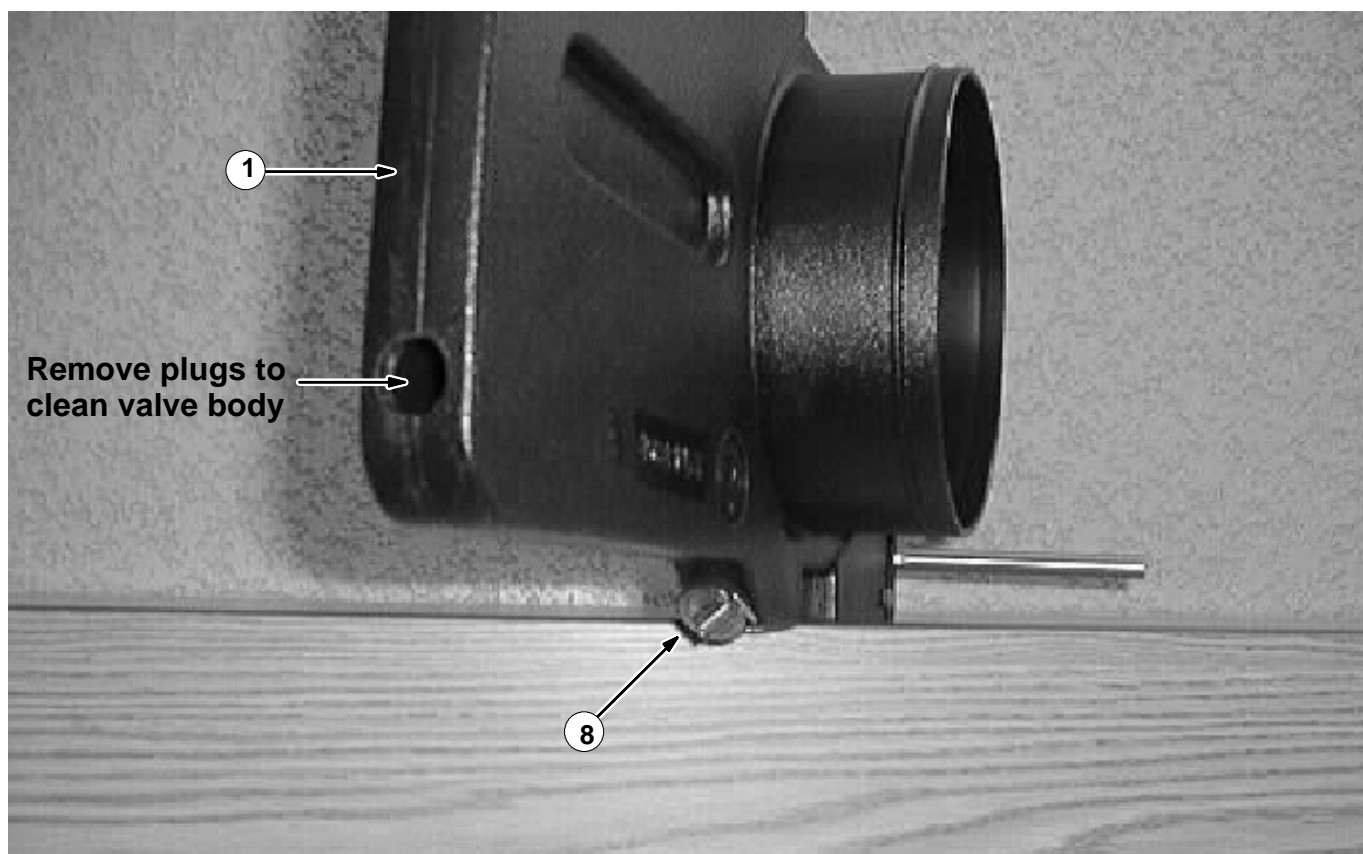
CONNECTOR TUBE REMOVAL
